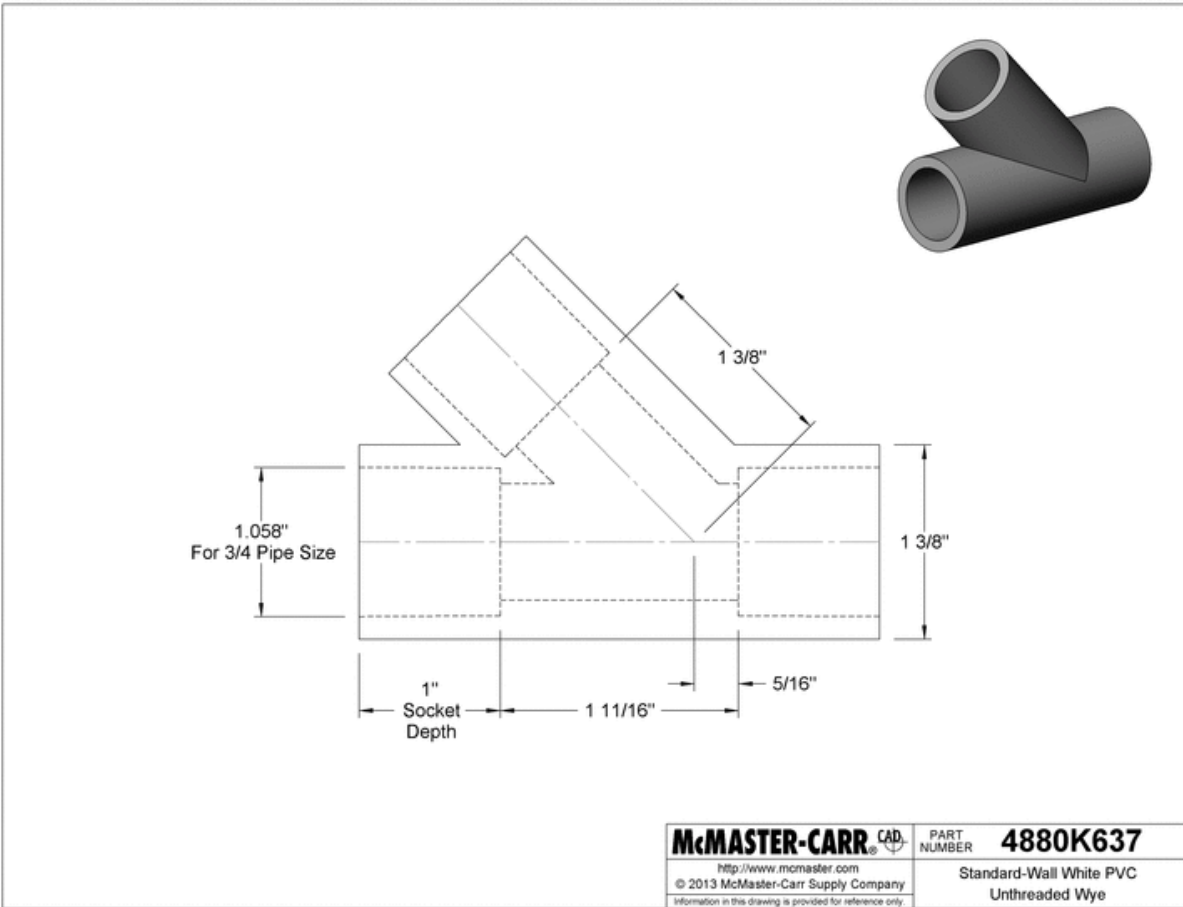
3/4 Inch PVC Wye Connector Engineering Drawing [28]
